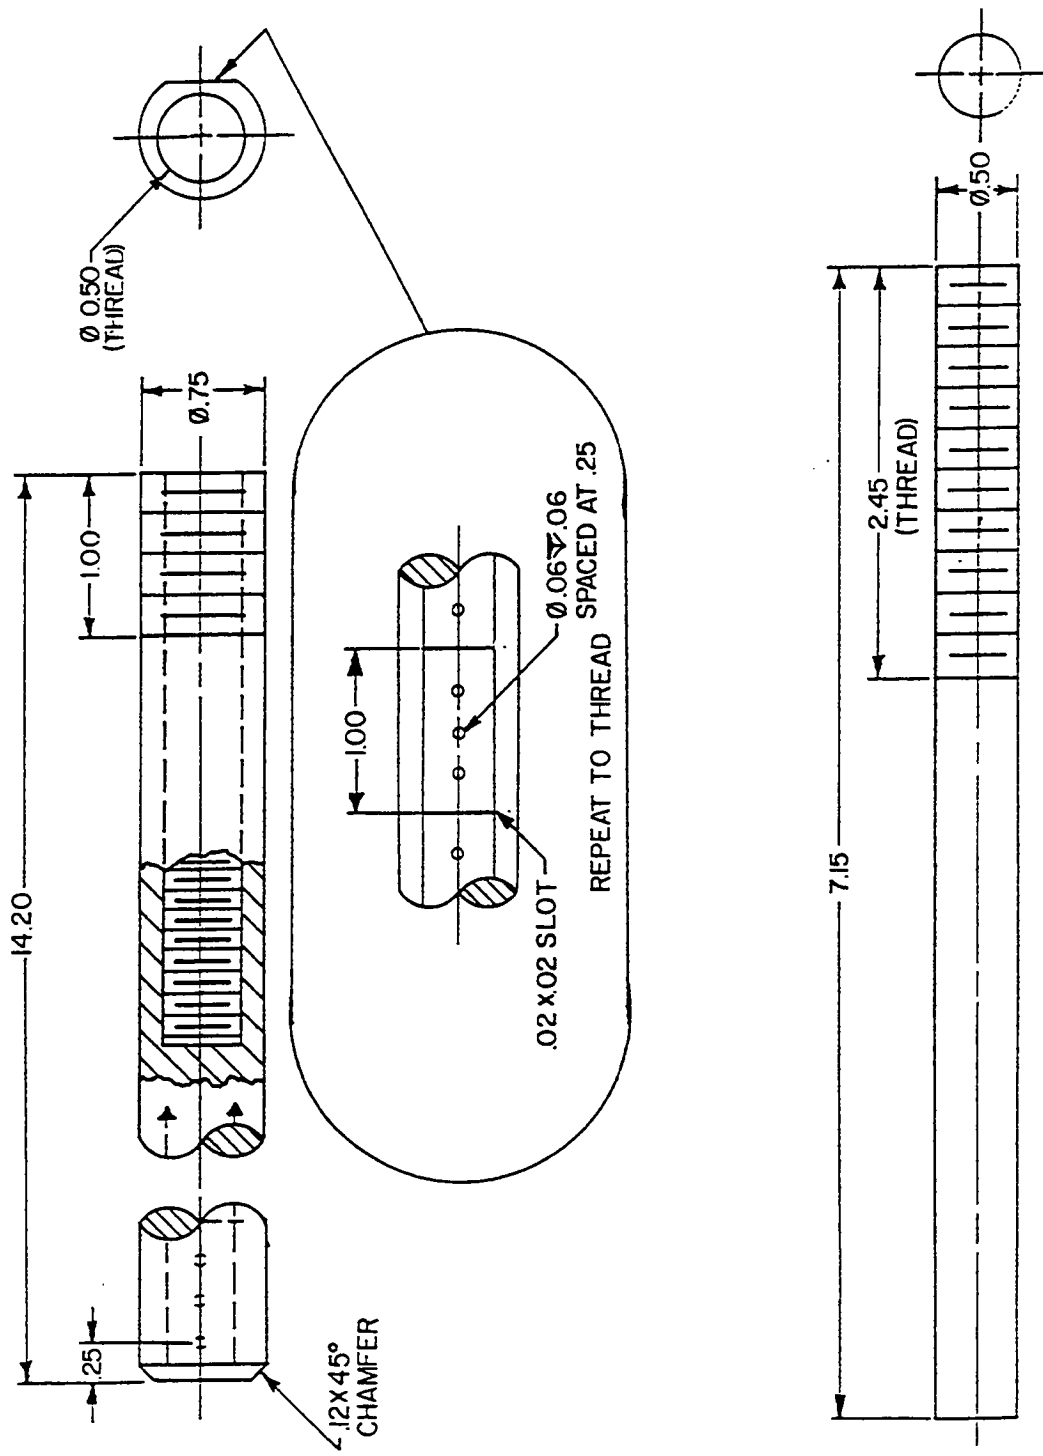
Overall view of the drilling stop gage to be mounted on the impact hammer.
